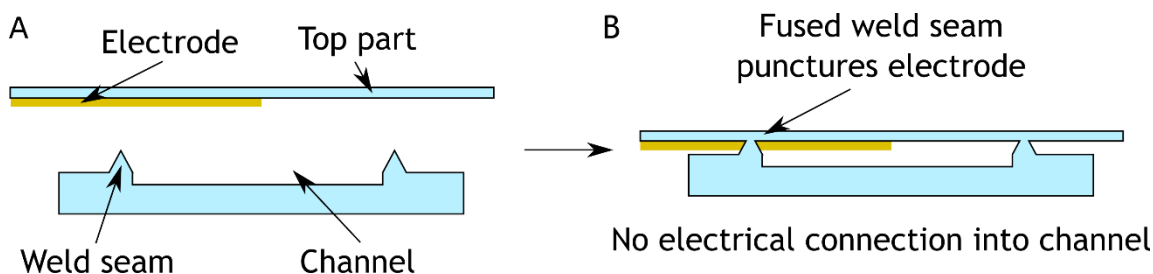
Issues with sealing electrodes with weld seams. A shows a schematic of a device consisting of a moulded channel (blue), and an evaporated gold electrode (yellow) prior to welding. B shows that after welding, the weld seam punctures through the electrode leading to no electrical connection into the channel.
